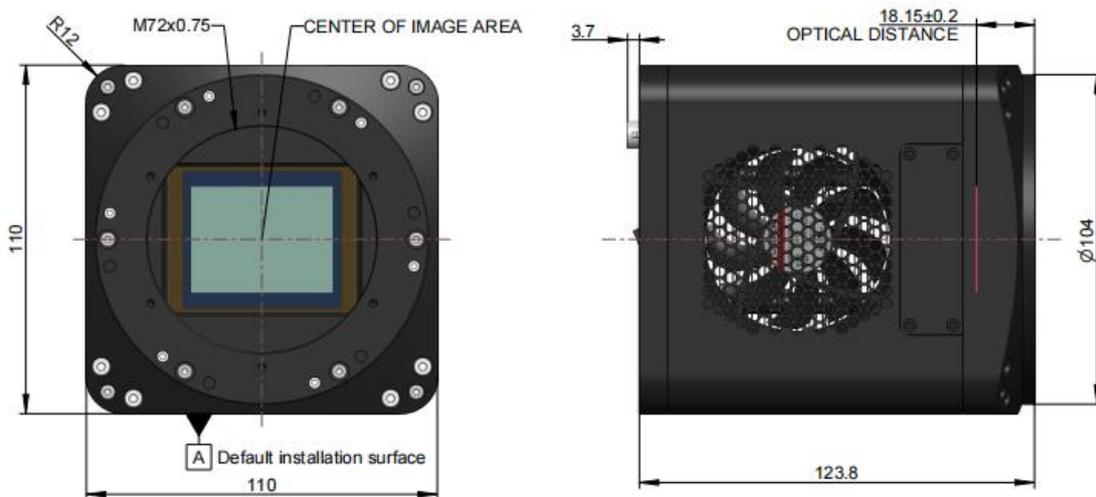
MaxCam-461M-TE dimensions (mm)
